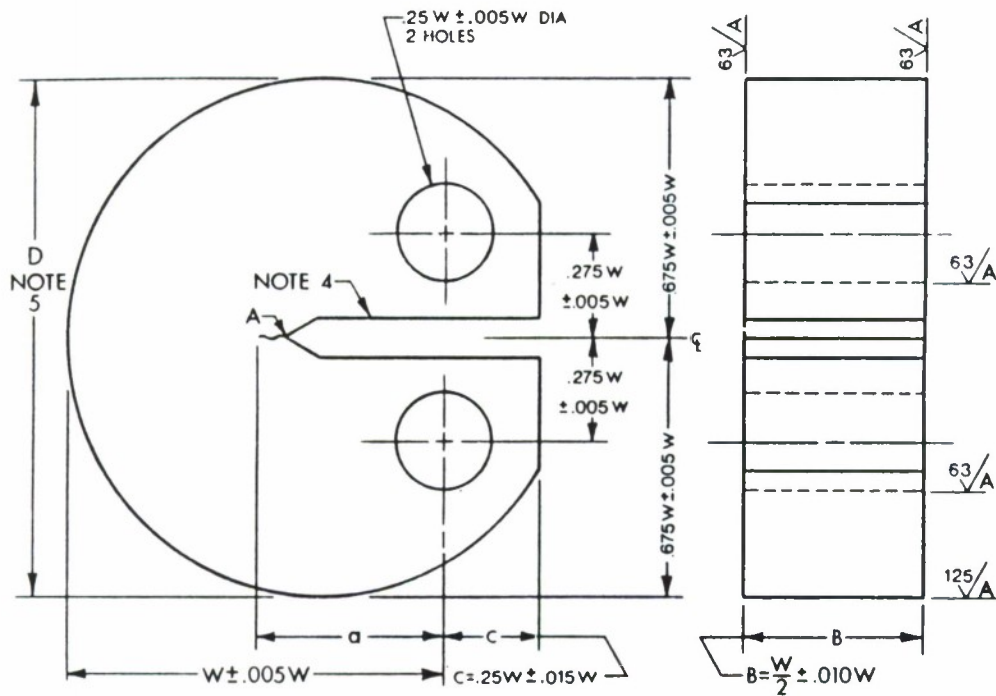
Disk-Shaped Compact Specimen DC(T) Standard Proportions and Tolerances
